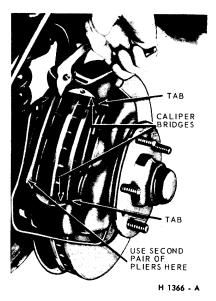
Removing Disc Brake Shoe and Lining Assembly
